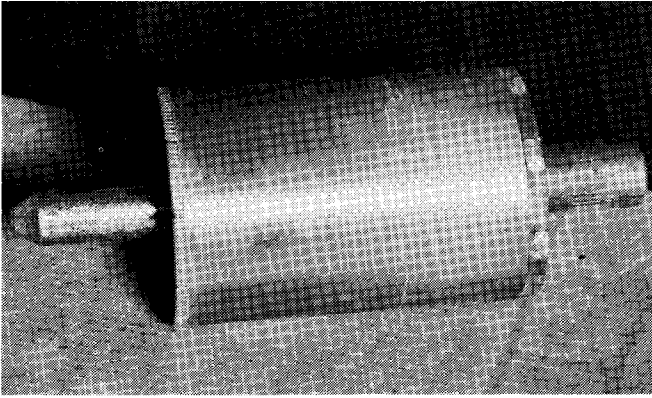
Starter barrel, 6 in. in diam by 1 ft long, with pilot and expander head adapted for EW drill rod.
